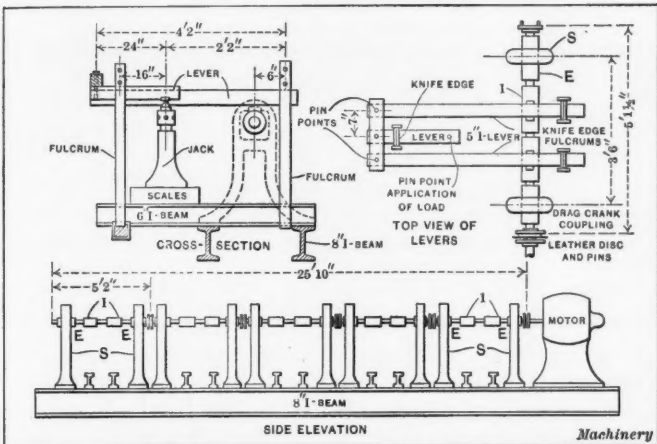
Diagram of Apparatus for testing Lineshaft Bearings
